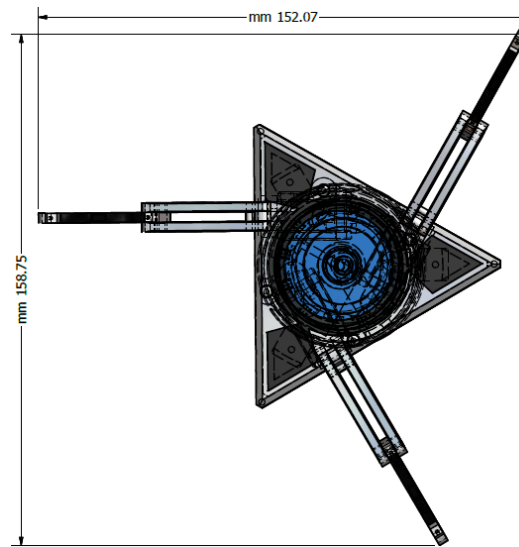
Reentry vehicle LEO payload grasping tool: front view [41]. The dimensions were expressed in mm.
